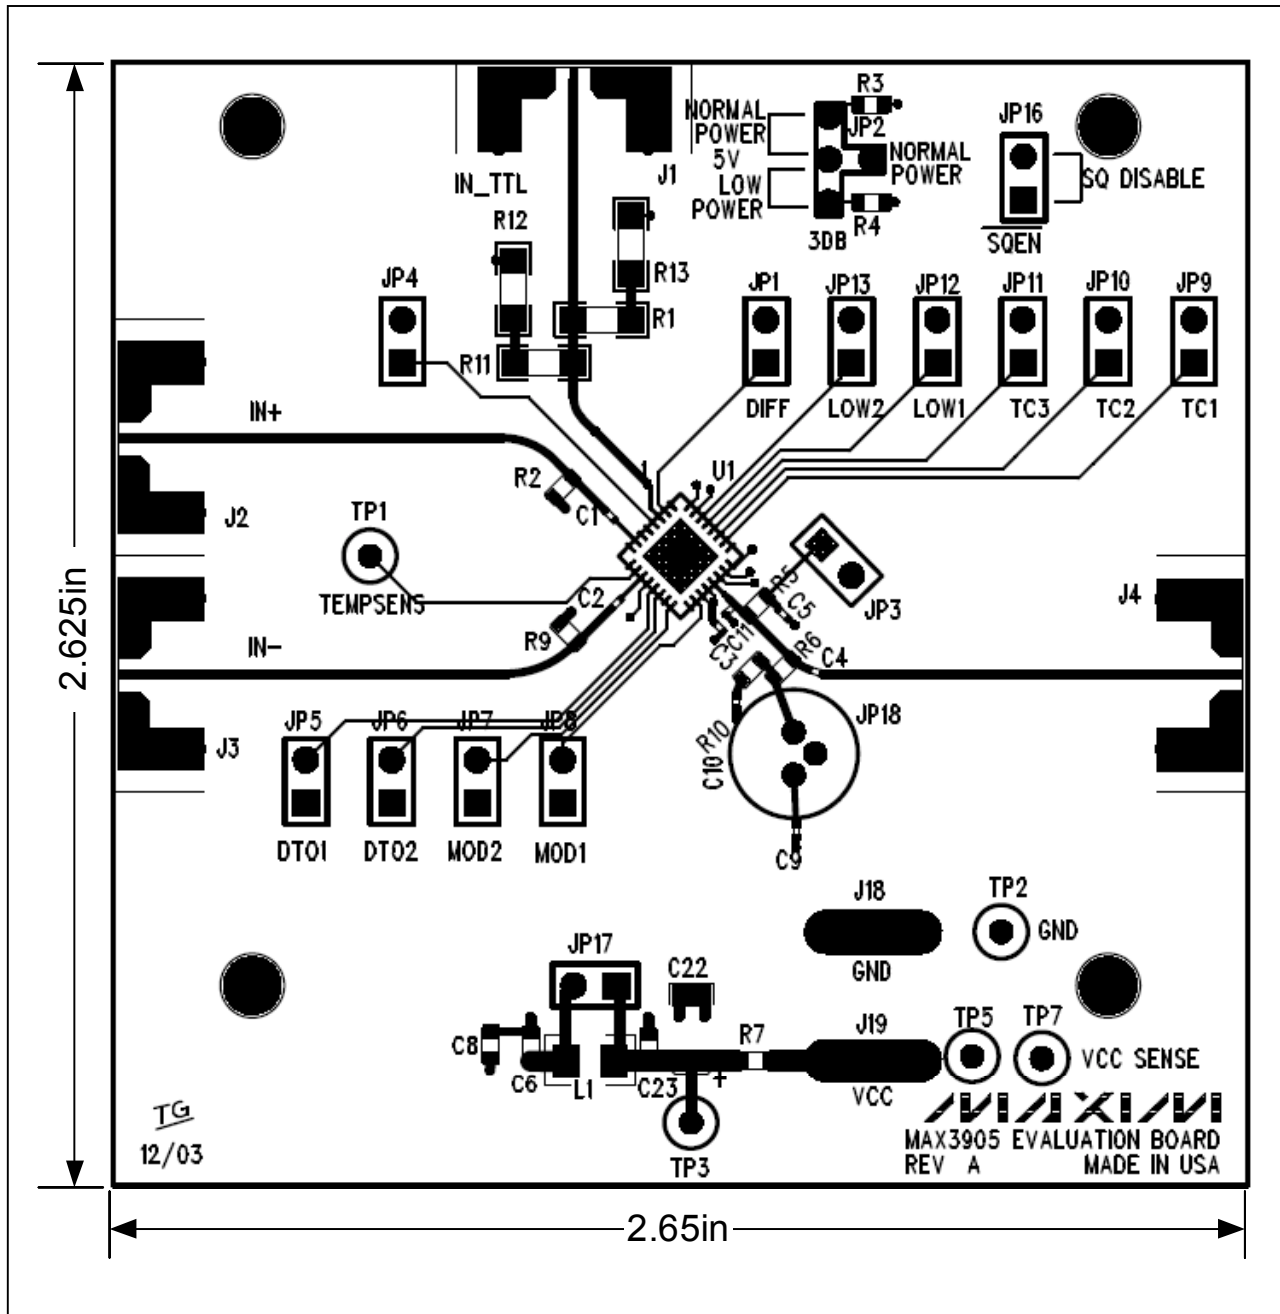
MAX3905 EV Kit Component Placement Guide – Component Side
